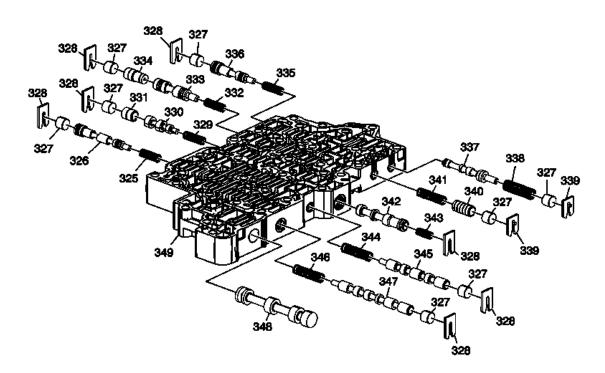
Control Valve Body Assembly Components Courtesy of GENERAL MOTORS COMPANY
